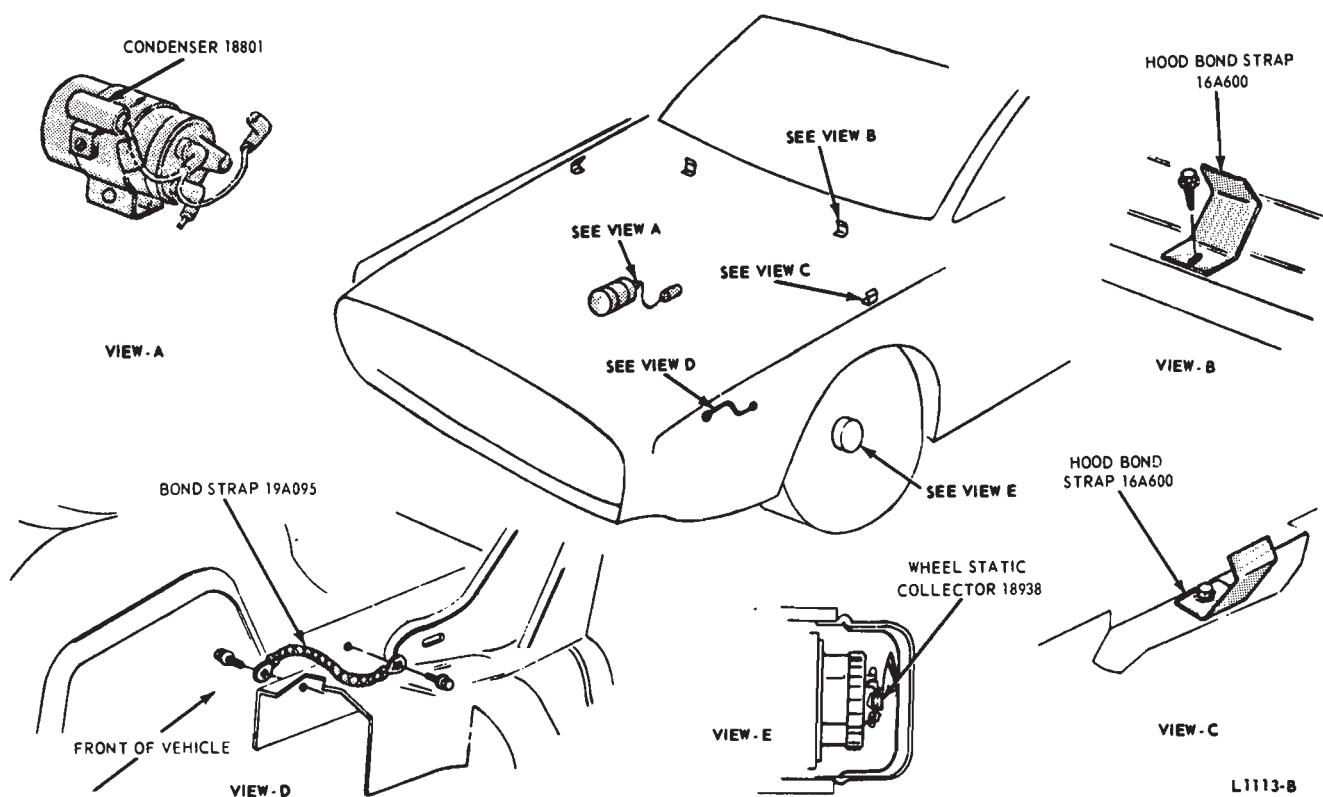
Thunderbird Radio Suppression Equipment Installation
